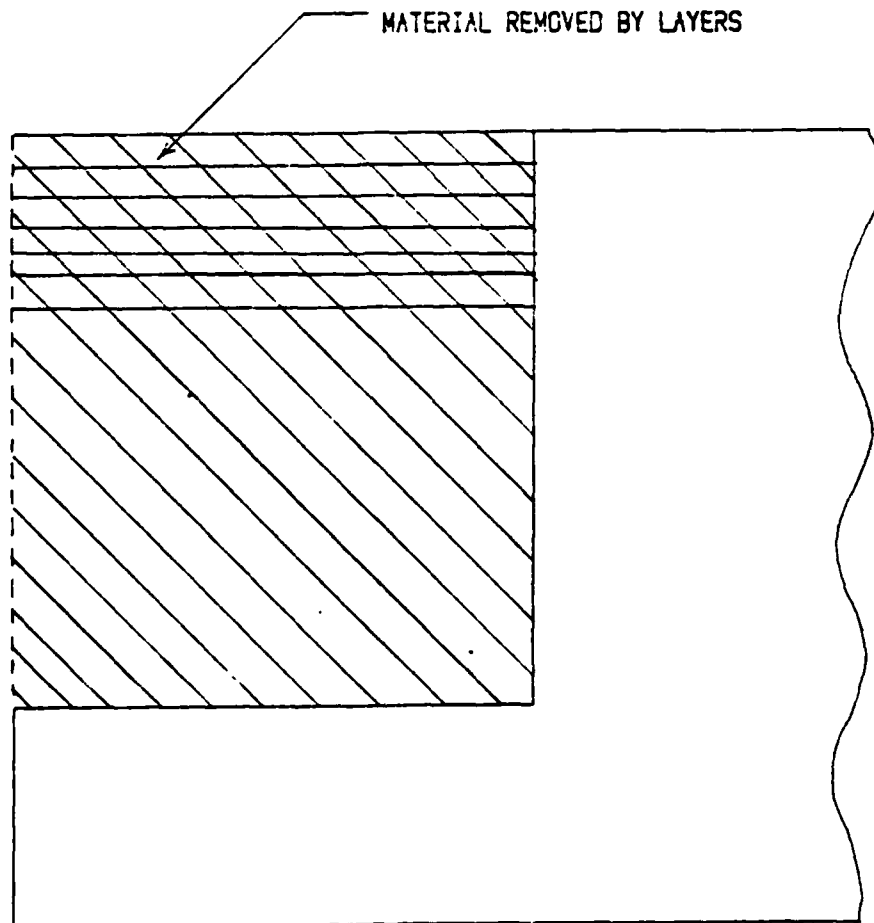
LAYER REMOVAL TECHNIQUE TO FORM STEP
